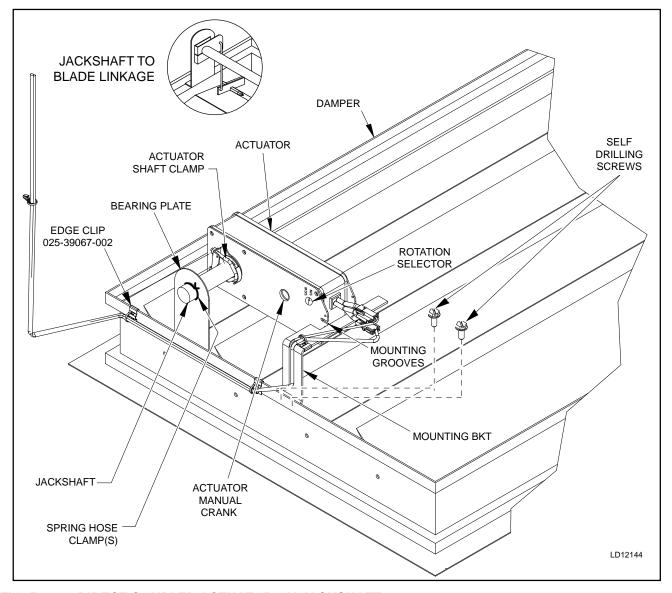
DIRECT COUPLED ACTUATOR ON JACKSHAFT
